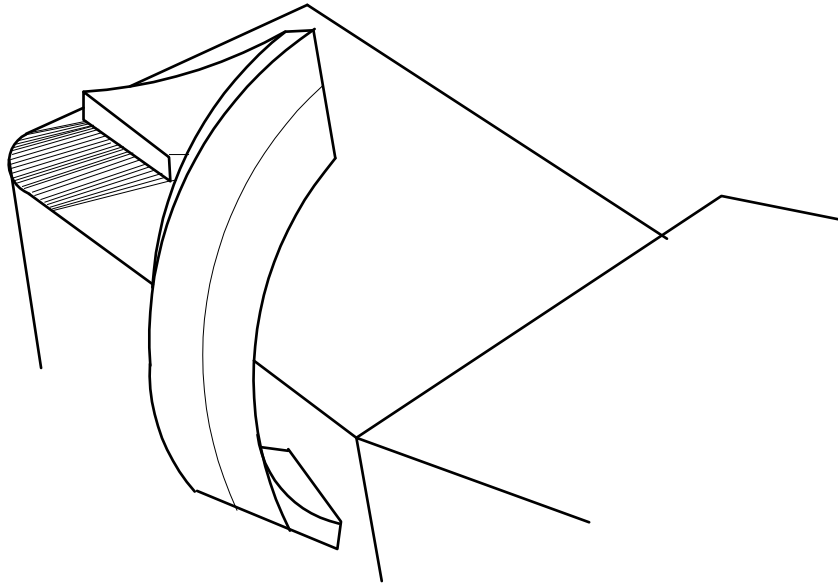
Chip breaking by contact with tool flank in 3-D machining
